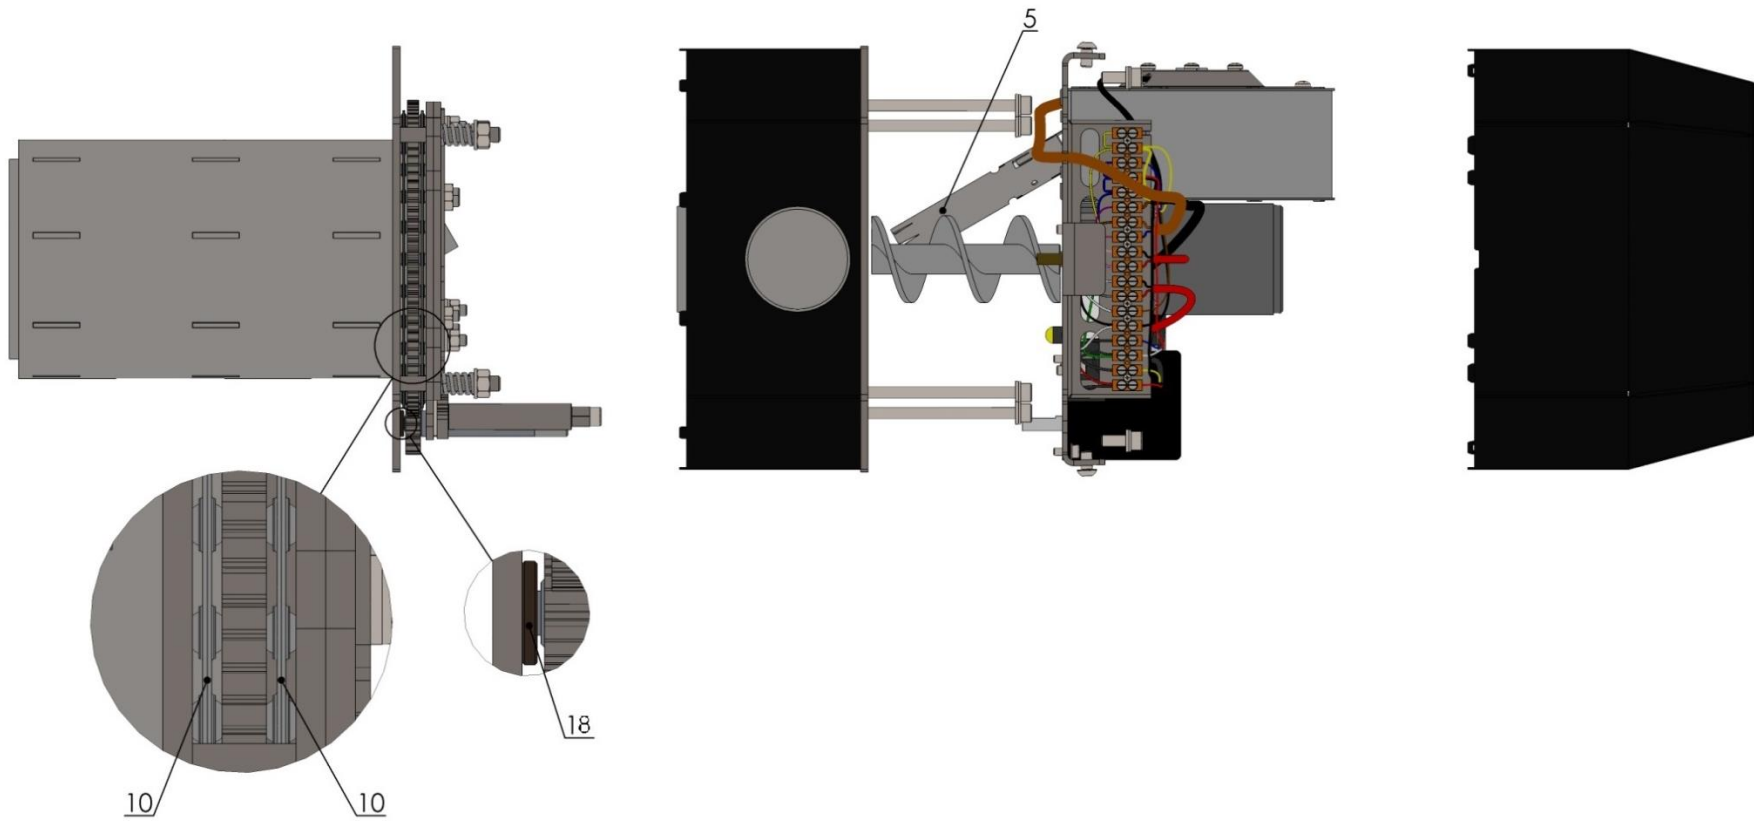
Lubrication of the combustion chamber bearings - view 2.
